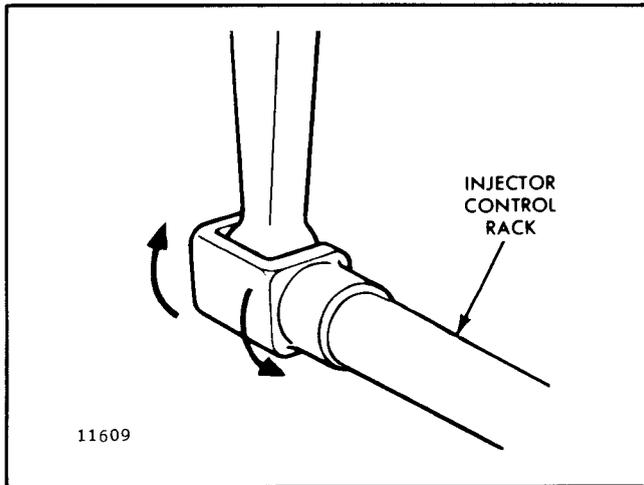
Checking Rotating Movement of Injector Control Rack
